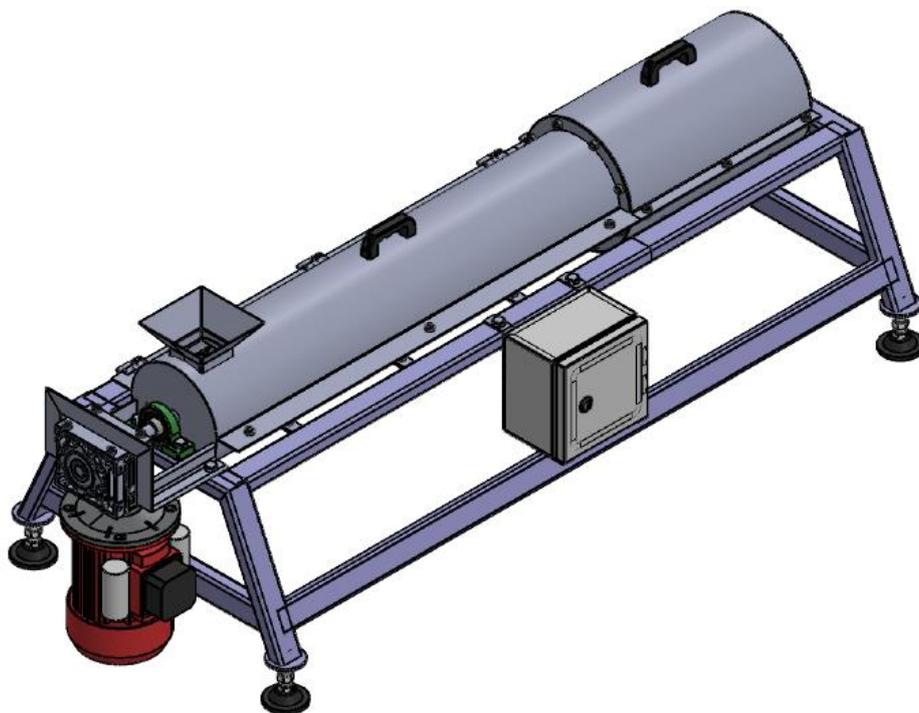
A pictorial view of cashew fruit and nut separator
